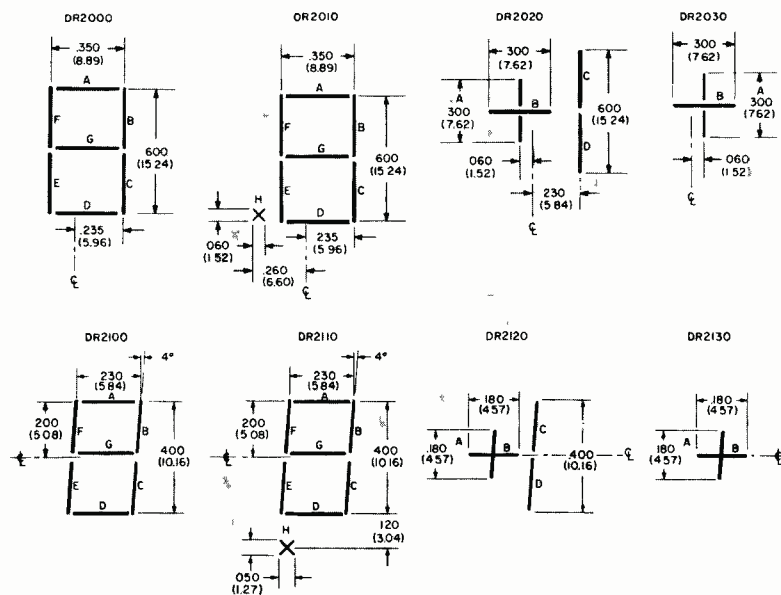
Character dimensions of NUMITRON display devices given in inches and millimeters.
